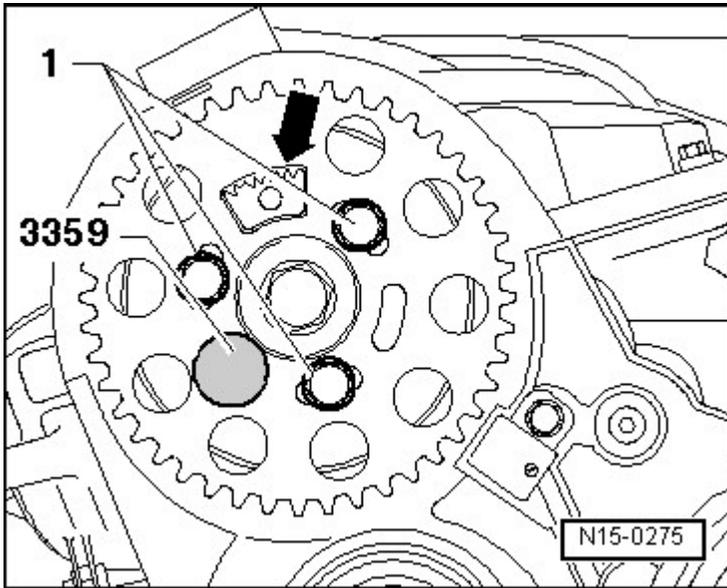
Identifying Camshaft Pulley Bolts And Toothed Segment -Arrow- Must Point Upward
